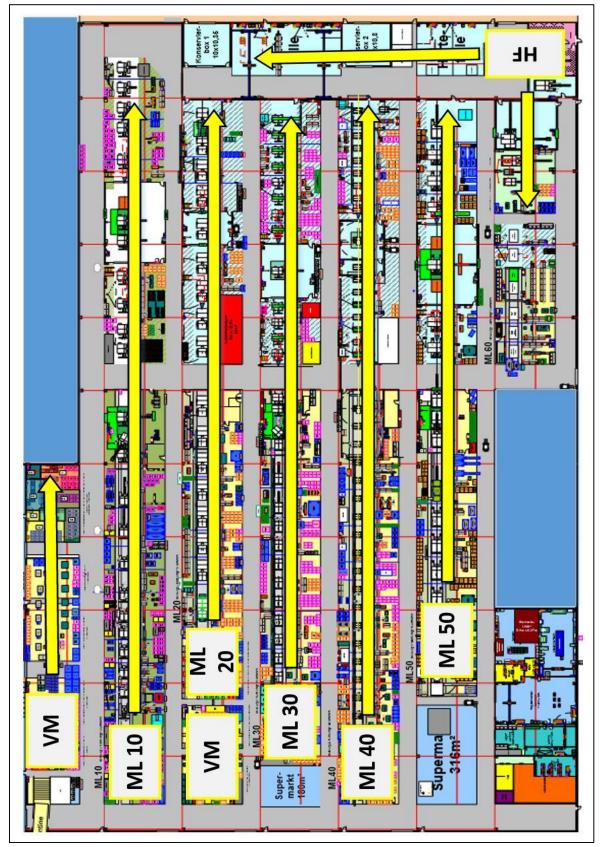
Shop floor layout Wacker Neuson Linz GmbH, source: Wacker Neuson (2016)., modified
